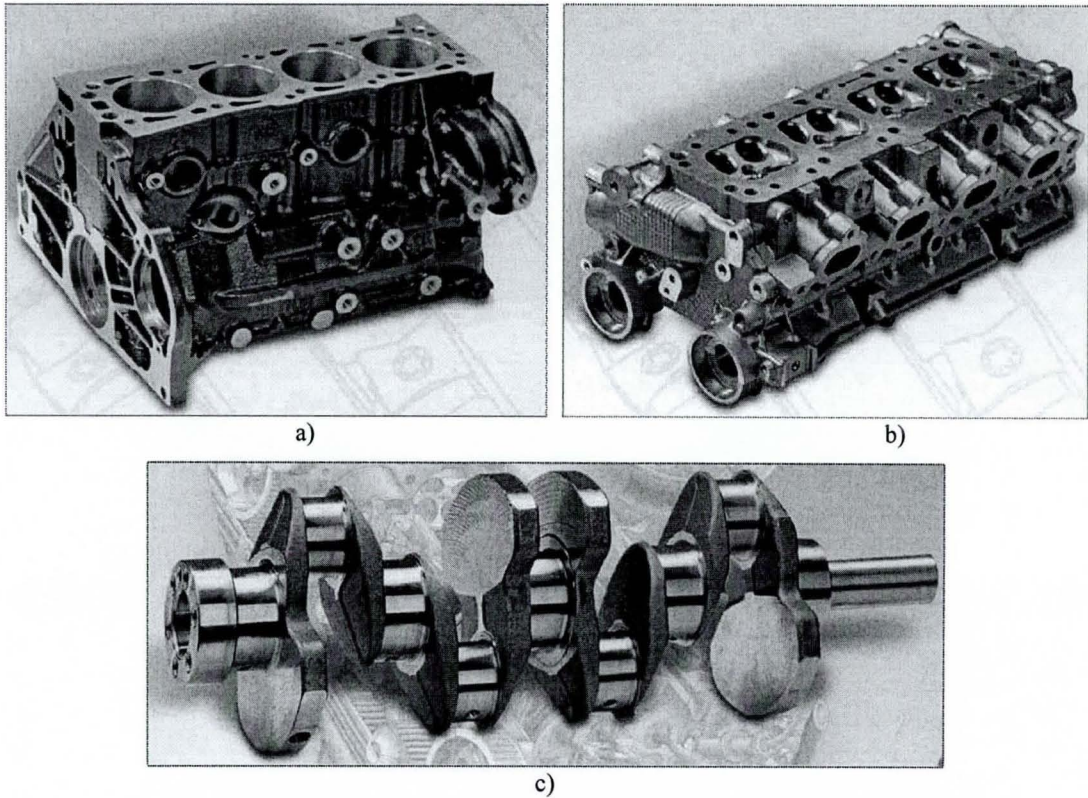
Prime engine parts: a) engine block; b) cylinder head; c) crankshaft. Source: IscarINauto catalogue of Iscar Ltd. company (ISCAR 2002).
